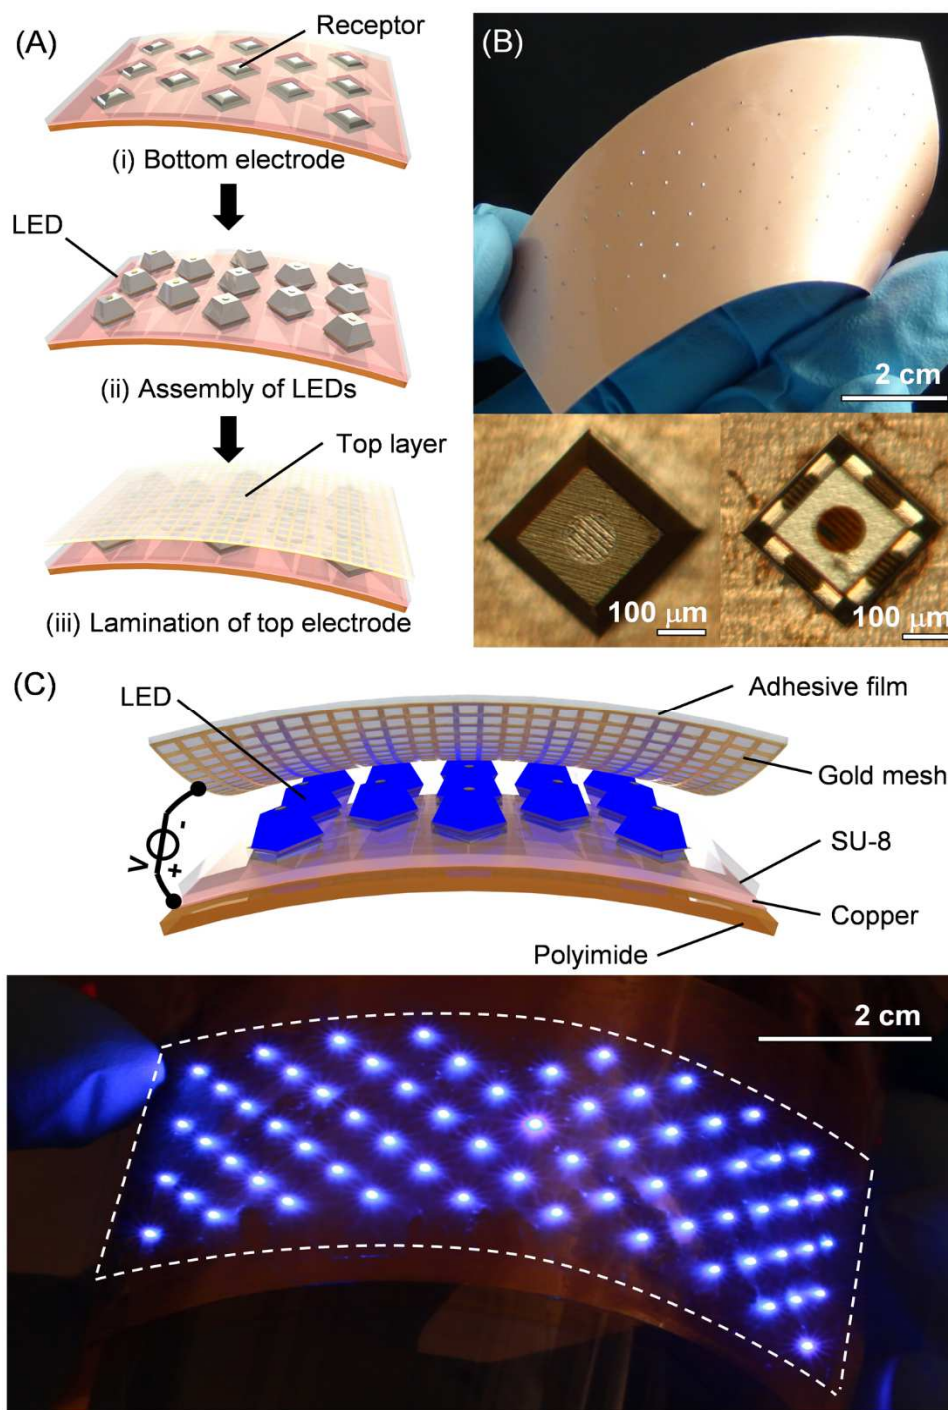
Flexible solid state lighting modules realized by the roll-to-roll fluidic self-assembly platform. (A) Fabrication steps: (i) Preparation of electrically isolated flexible bottom electrode with receptors, (ii) assembly of LED using the roll-to-roll fluidic self-assembly system, and (iii) lamination of top conductive film. (B) Photograph of assembled LEDs on flexible bottom electrode, close-ups of LEDs: with an anti-solder wetting layer to control right-side-up assembly (bottom, left), and after removing the anti-solder wetting layer (bottom, right). (C) Photograph of flexible solid state lighting modules.
